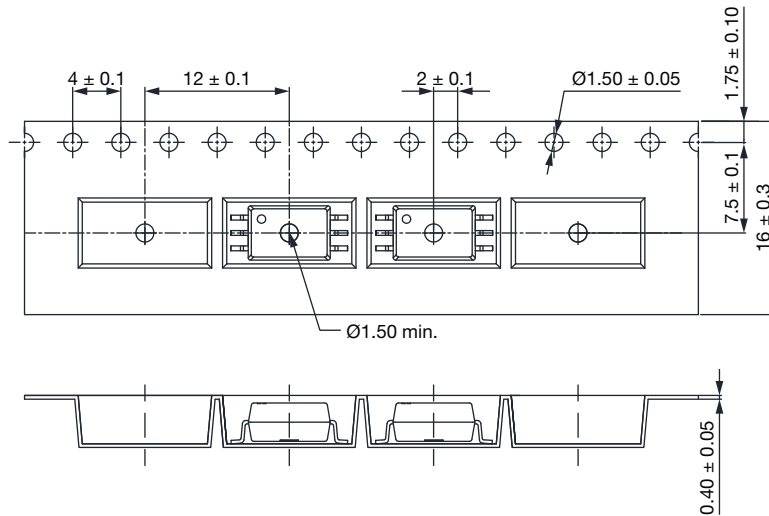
Tape and Reel Packaging (1000 pieces on reel)
